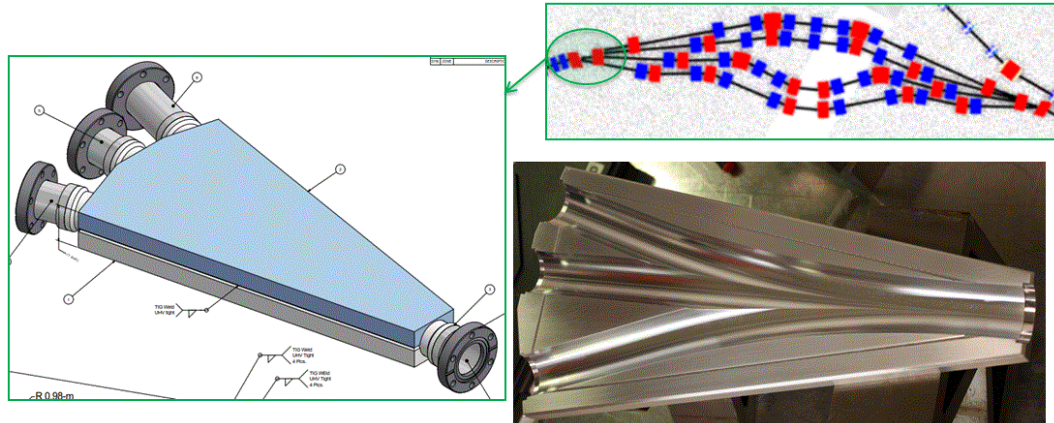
Example design for beam splitting and combing chamber, by welding two machined aluminum halves with smooth beam path transitions.
